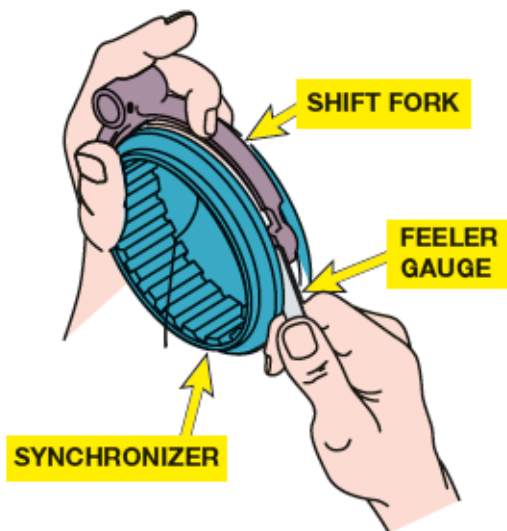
There should be a specified clearance, usually about 0.030 inch (0.8 mm), between the fork and the groove in the sleeve.
